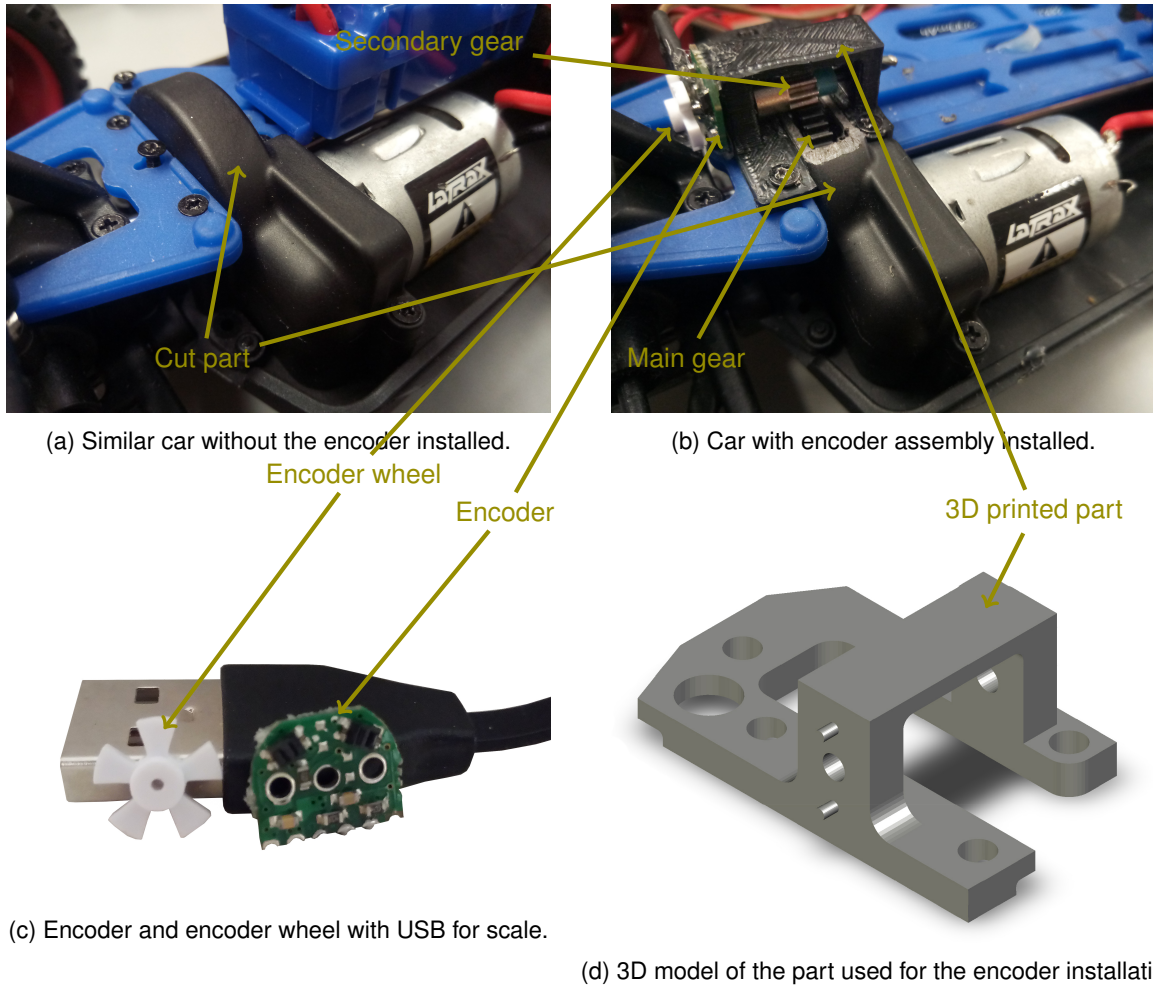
Encoder assembly. The "Cut part" is the plastic part that was cut to expose the main shaft's gear. The "Secondary gear" is the gear, with the same dimensions as the motor gear, which connects the main shaft's gear to the encoder shaft. The "Main gear" refers to the main shaft's gear, a gear that is connected to the main shaft which transmits power to the wheels. The other three parts' names are self-explanatory.
